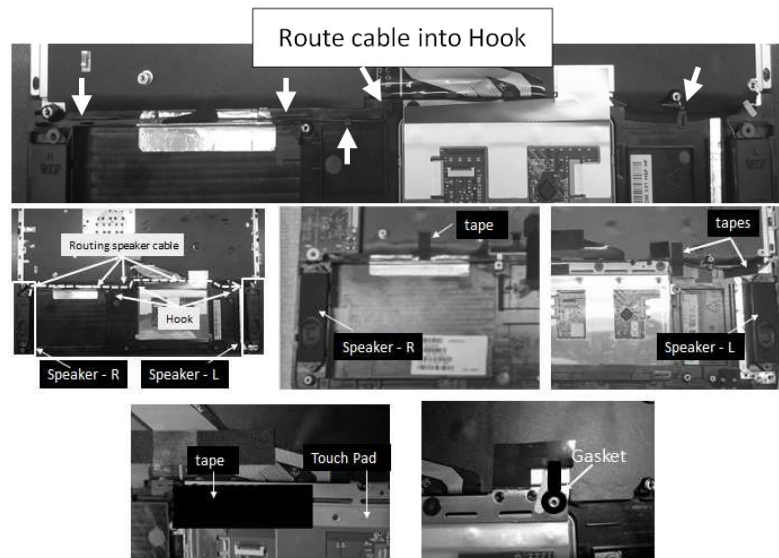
Removing Speaker and Touch pad (or Secure pad)
